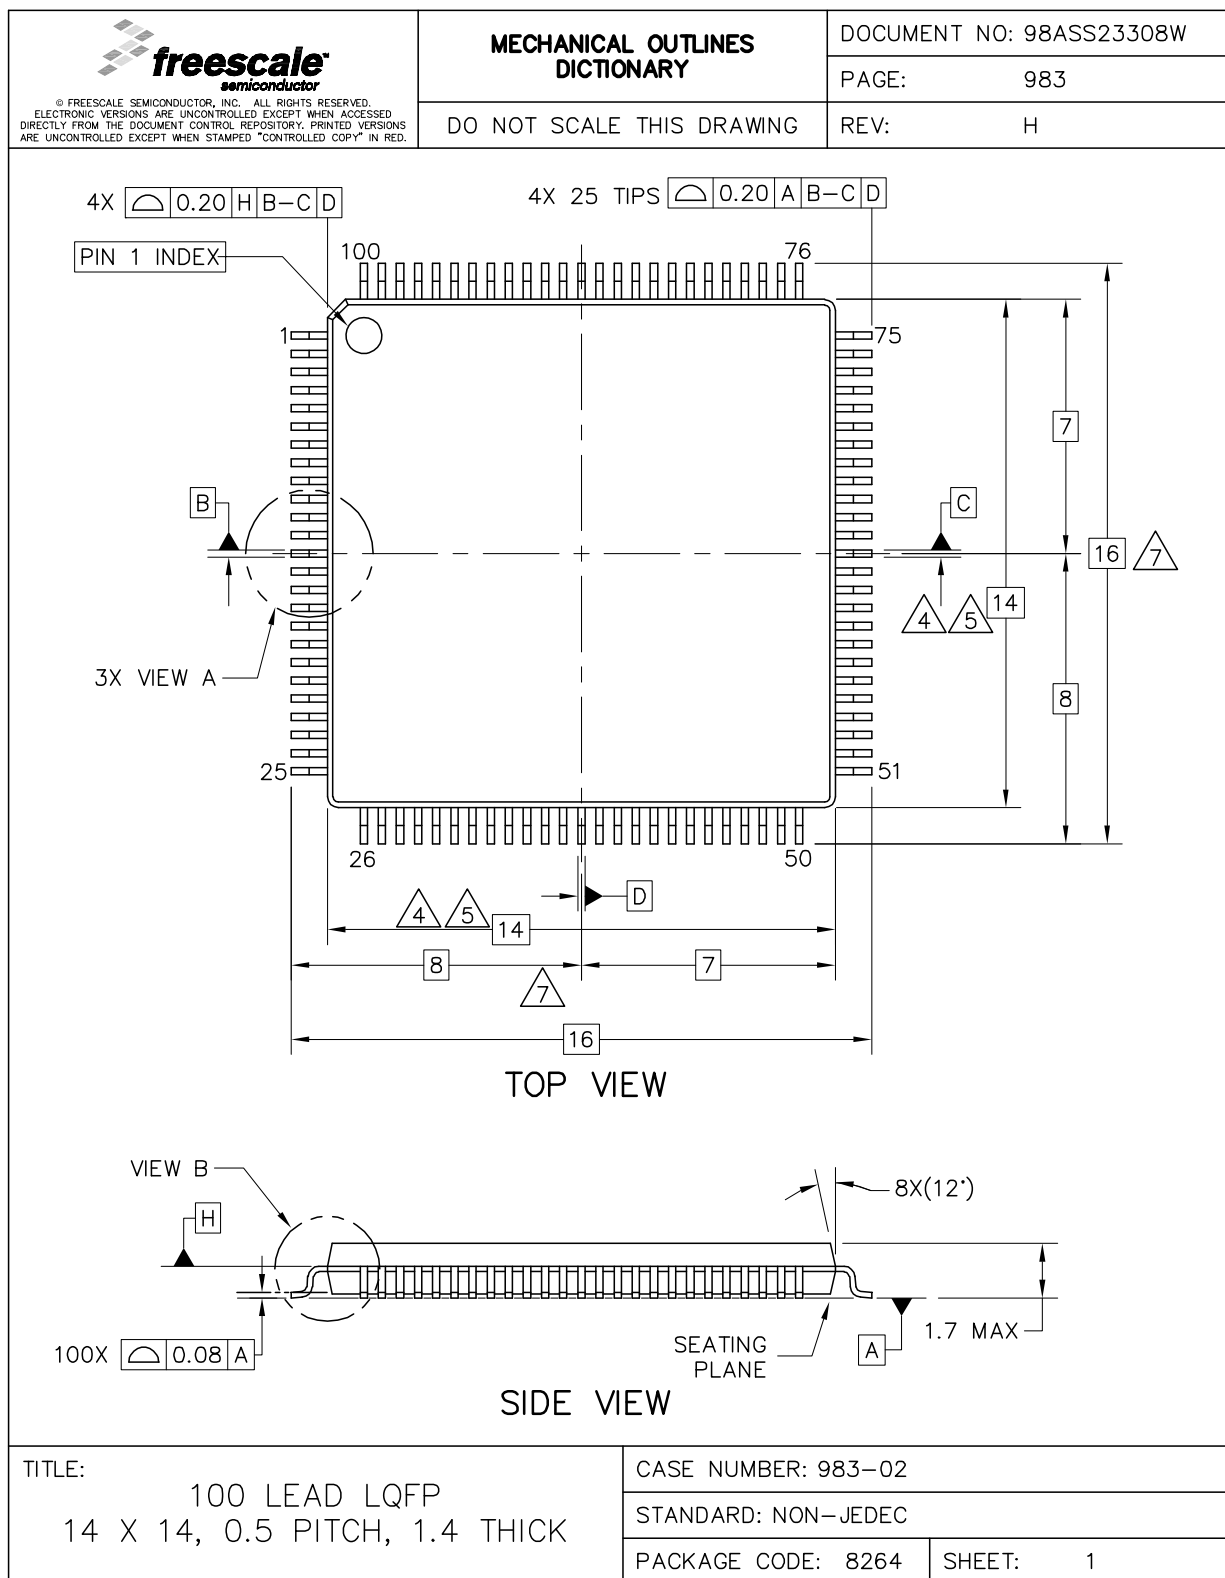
100 LQFP package mechanical drawing (1 of 3)
